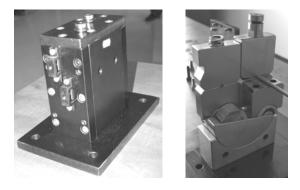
Experimental model – general view (left) and partial view (right) on the assembly of the mechanism.
